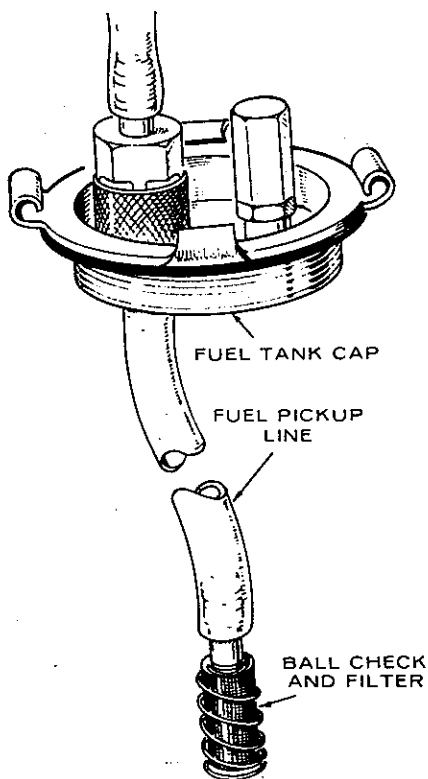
FUEL CAP AND PICKUP ASSEMBLY
